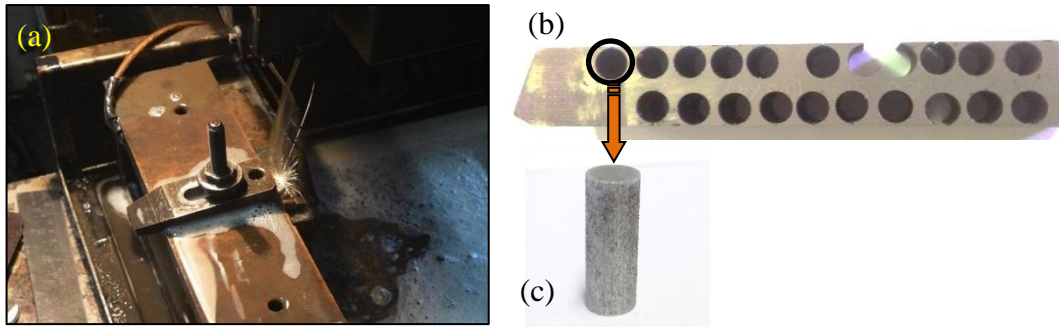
(a) Fabrication of pins using a wire-cut electrical discharge machine, (b) plasma nitride high-speed steel cutting tool blank and (c) fabricated pin
